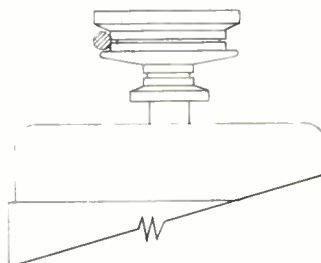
Flat-bottom motor pulley, showing groove to eliminate wandering of round belt.
